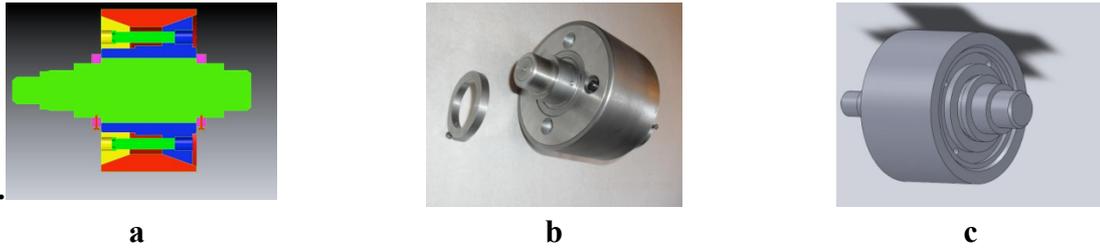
Variant F₁₂ – Conical cylinder inside, long conical parts assembled and long screws:
